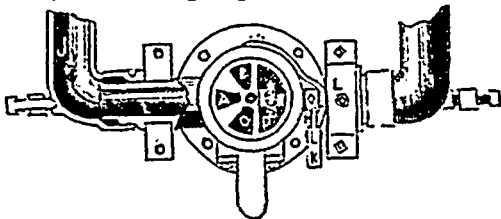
Plan showing the Face of Steam-Chest, Steam-Ports, Steam and Exhaust Pipes.
